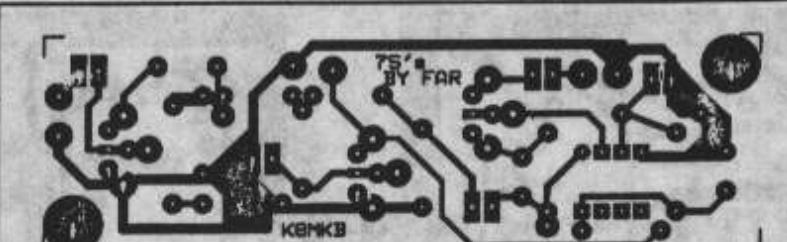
PC board foil pattern for the noise-limiter + filter (refer to Figure 2).
